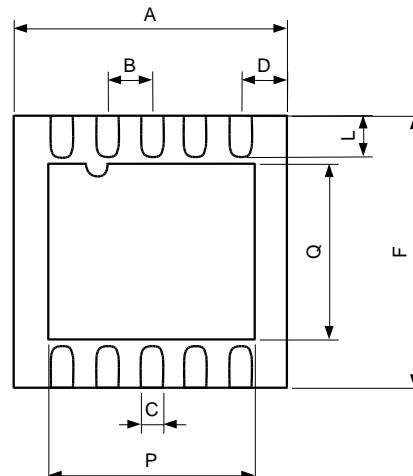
DFN-10 Package dimensions (bottom). Note that the saddle needs to be connected to GND on the PCB.
